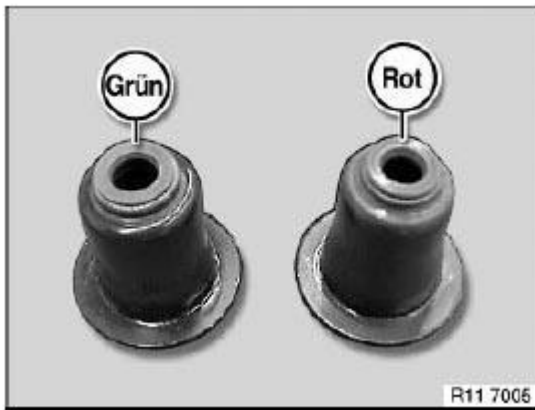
Identifying Valve Stem Diameters With Color-Coded
